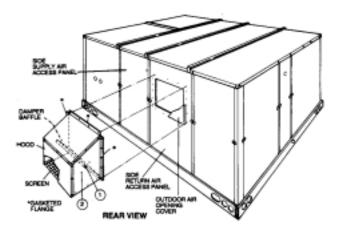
FIXED OUTDOOR AIR DAMPER
